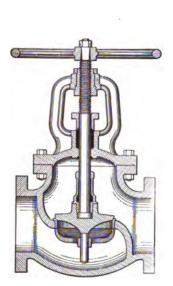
IRON-BODY GLOBE VALVE—BRASS-MOUNTED.
